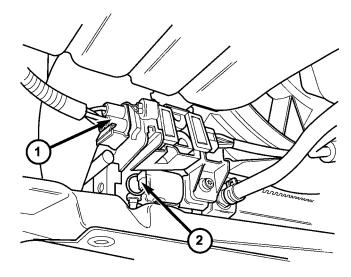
Power Steering Pump Removal REMOVAL - 2.4L TURBO
